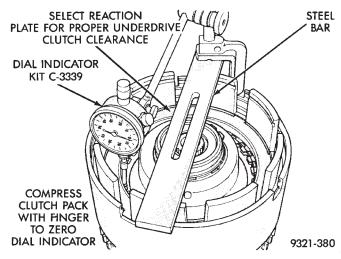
Set Up Dial Indicator for Clutch Clearance
